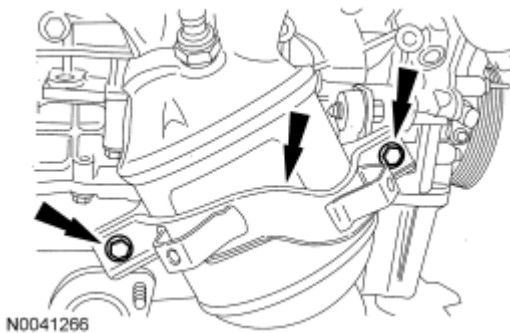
Locating Catalytic Converter Bracket And Bolts
